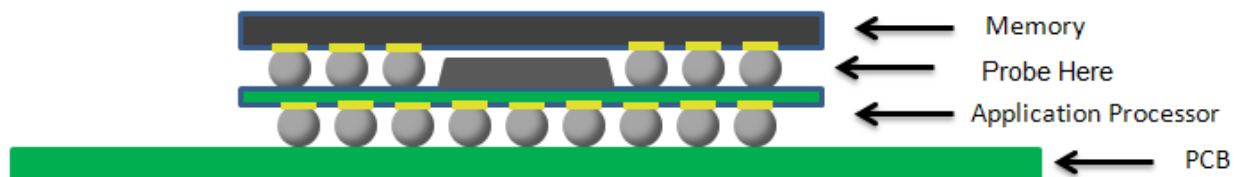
Side view (Drawing) of the PoP memory soldered onto a processor
